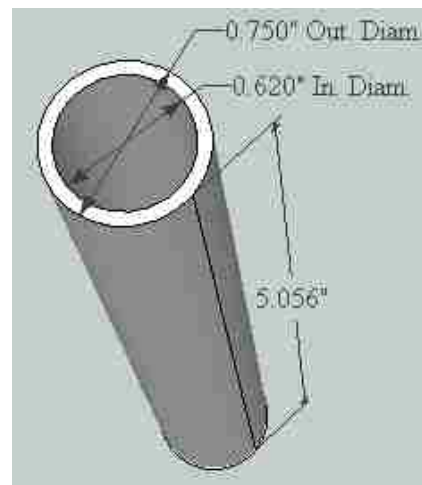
Middle aluminum spacer tubes which connect the middle and upper trimmers. There are four middle aluminum spacer tubes per applicator.
